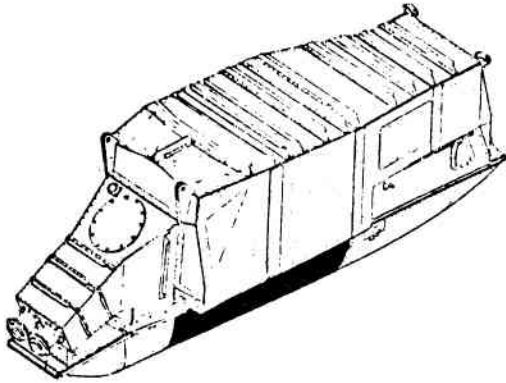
B. F-106A Gun Fairing Structure (Sheet 1 of 3)
